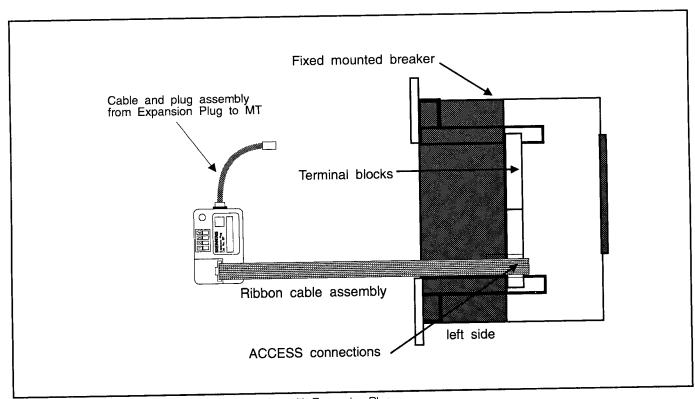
Fixed-Mounted Type SB Circuit Breaker with Expansion Plug
